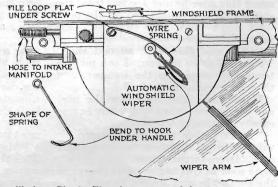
The wiper on any of the vacuum types of automobile windshield wipers can be kept out of the way with a piece of spring wire bent as shown
